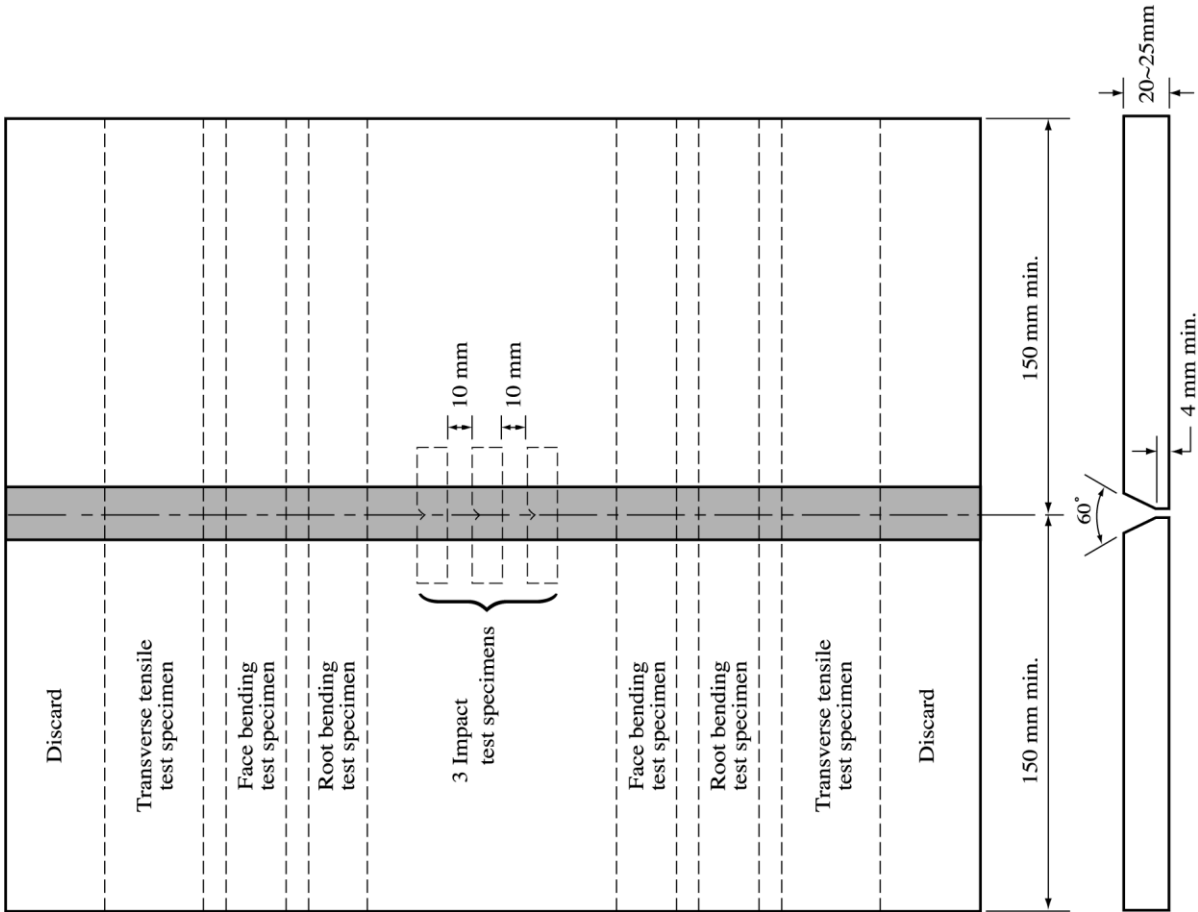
Butt Weld Test Assembly for Automatic Multi-run Technique Welding Materials
